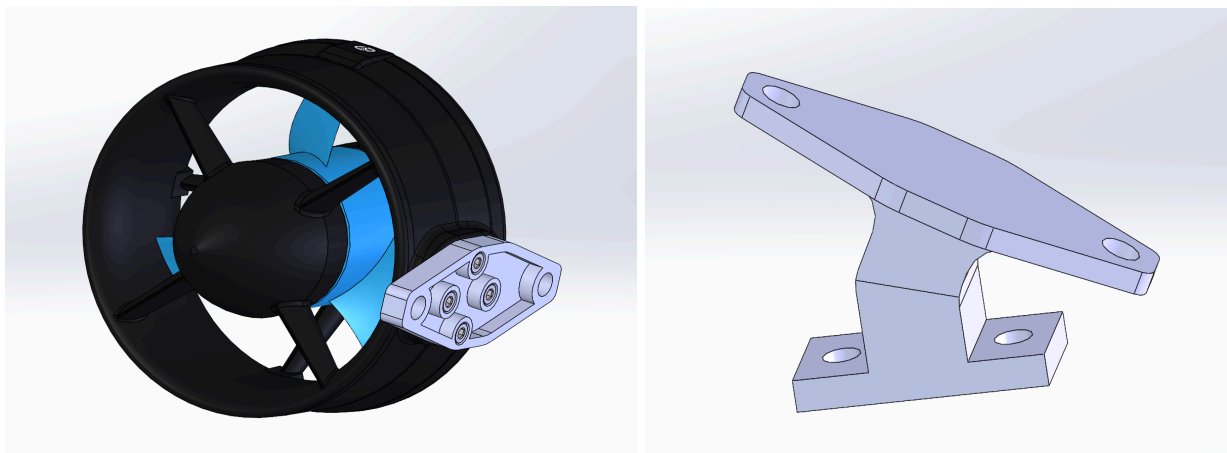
Motor Bracket with T200 Thruster [Left] and Motor Mount [Right]
